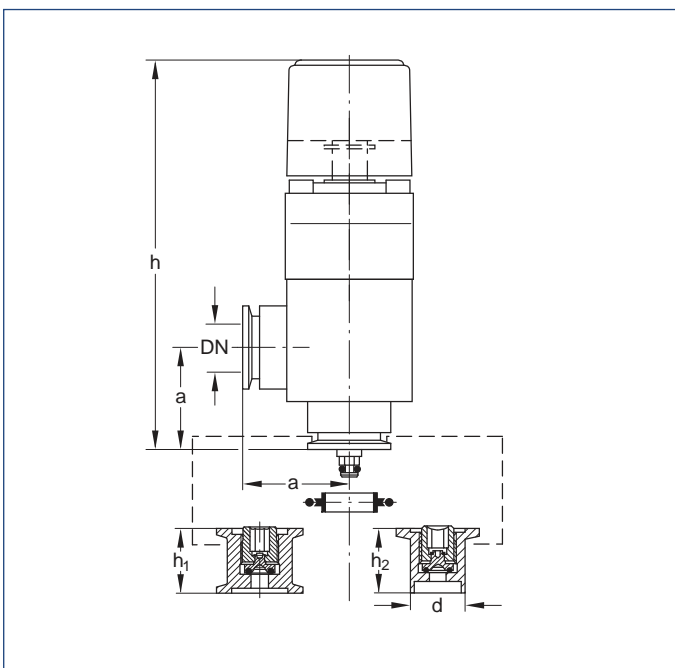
Gas lock with centering ring and seal-off fitting, sectional view
